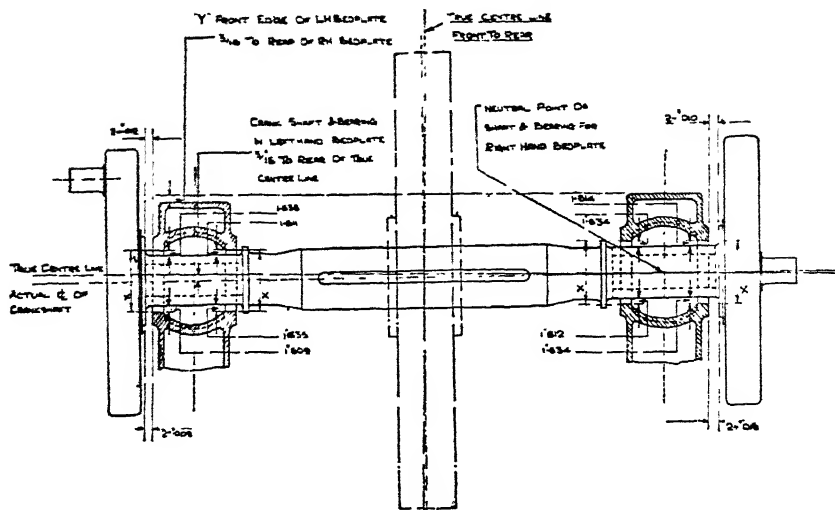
PLAN SHOWING CRANKSHAFT SET UP FOR TAKING MEASUREMENTS
